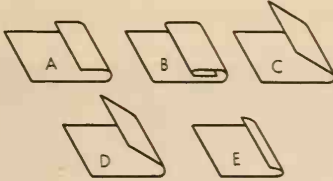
Common hems that can be turned on the bar folder: (A) single hem; (B) double hem; (C) sharp lock; (D) open lock; (E) turned edge to receive a wire.
